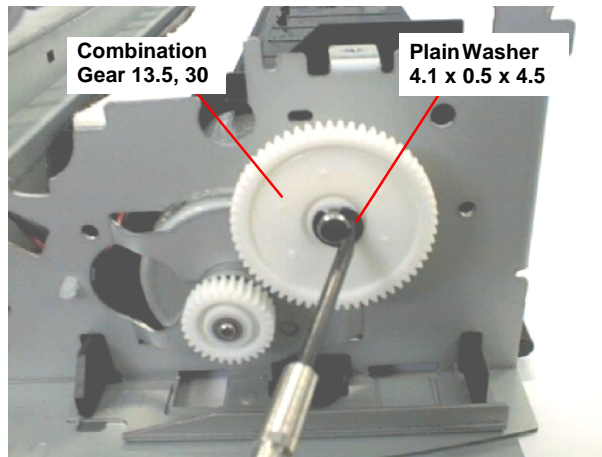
Removing the Flat Washer & Gear 13.5,30
